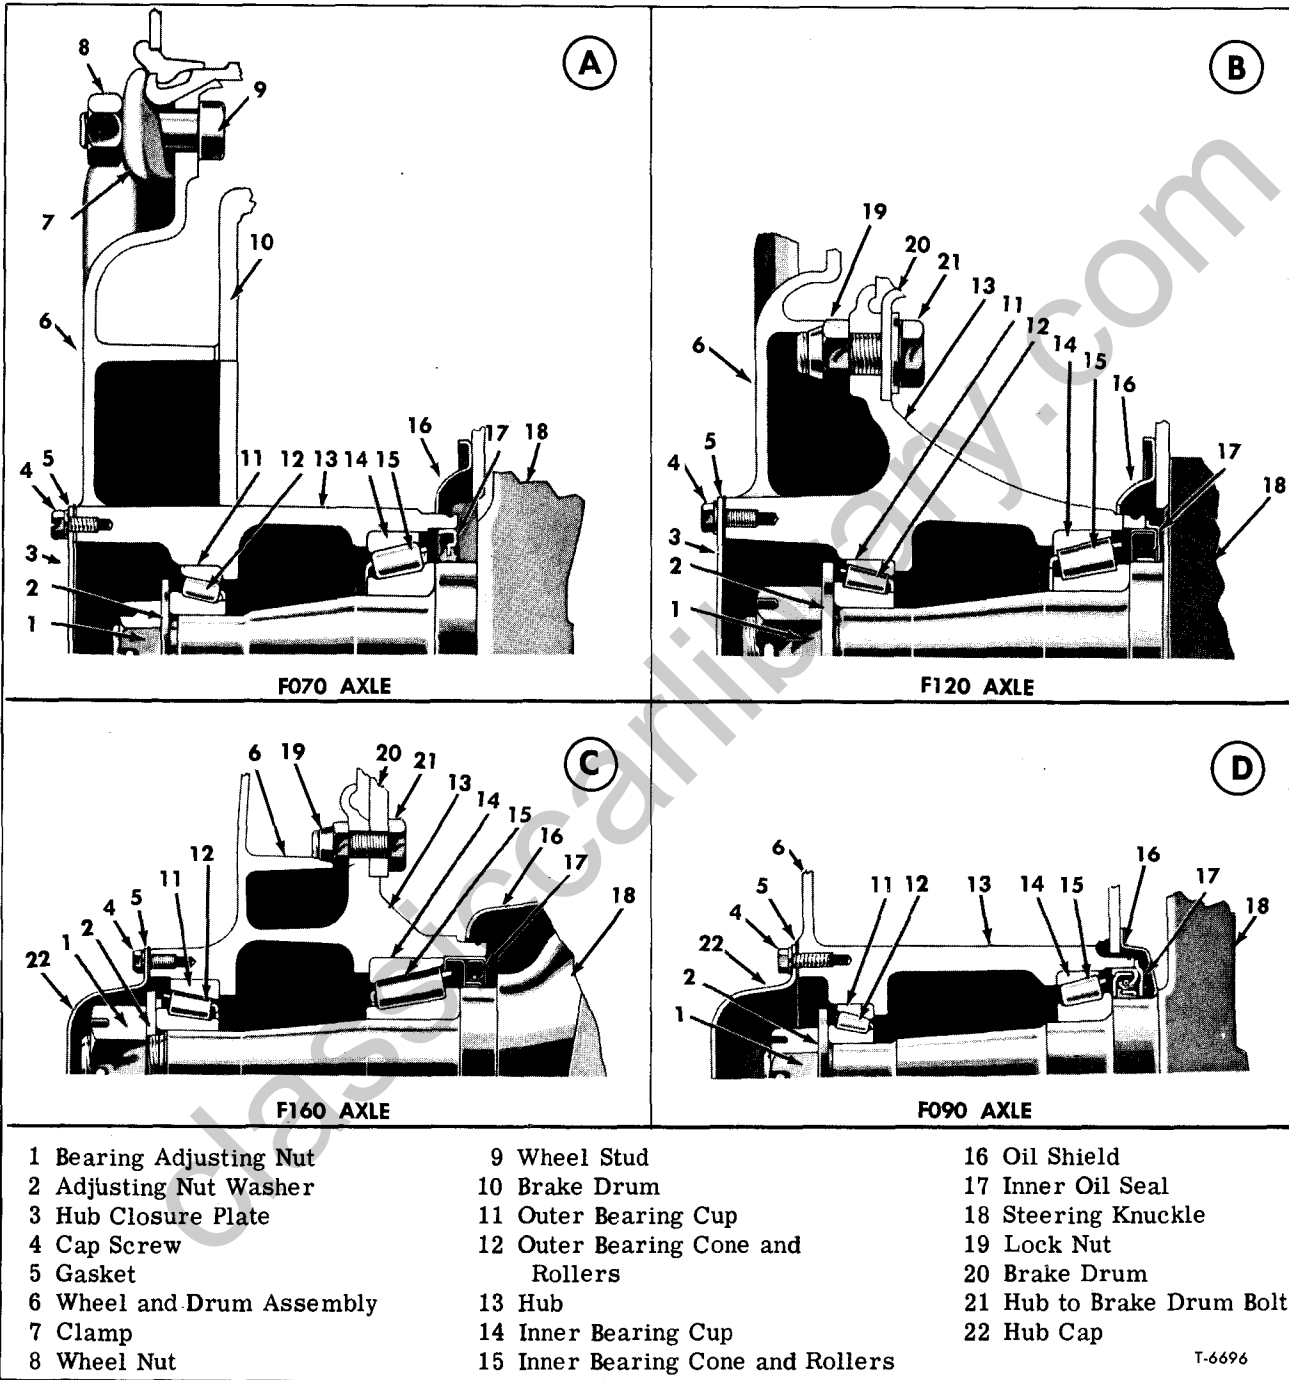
Front Hubs and Bearings (with Cast Type Wheels) (Typical)
